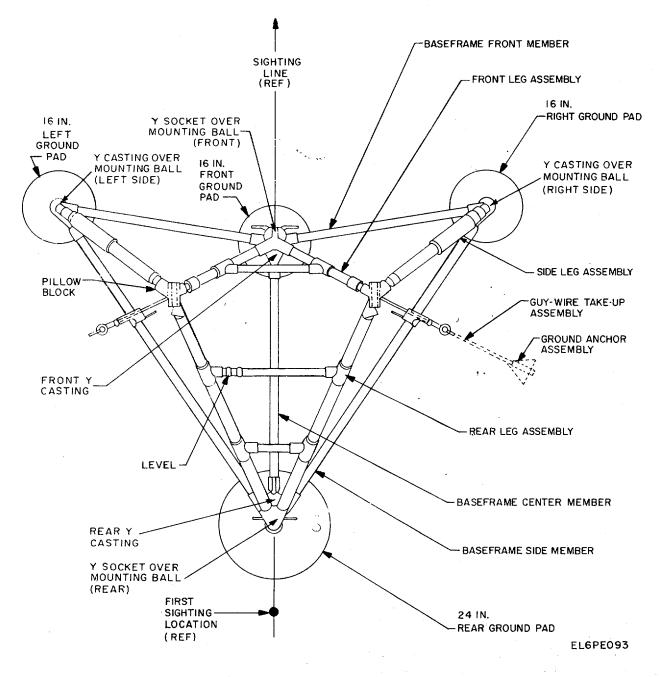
Assembled Antenna Support Structure, Plan View.
